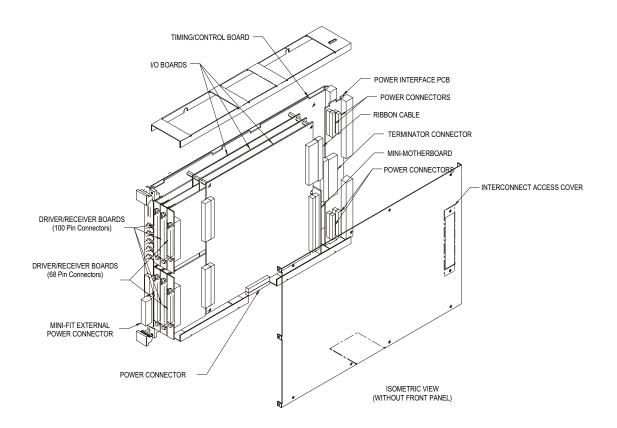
SR2510 Main Module, Exploded View Showing Major Components.
